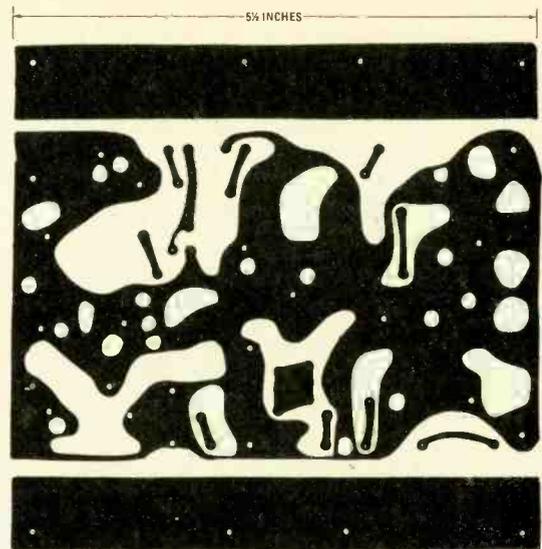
FOIL PATTERN for the top surface of the double-sided PC board.
